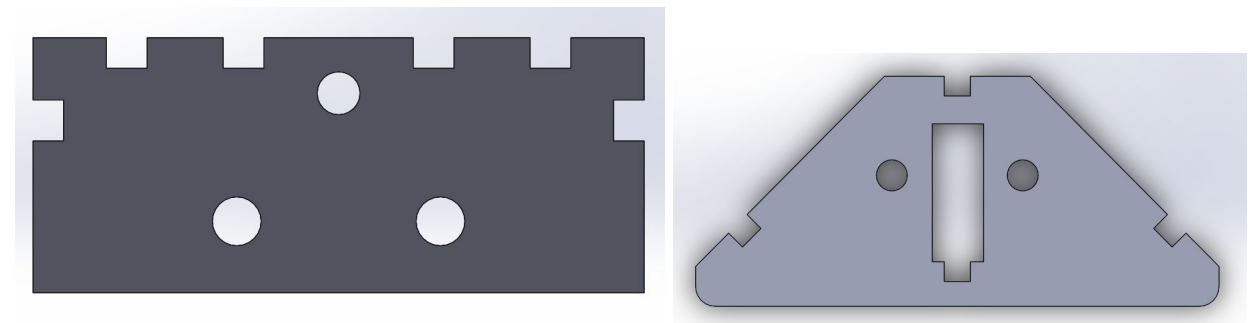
Side views of housing for the motor (left), and base of the jumper (right)
